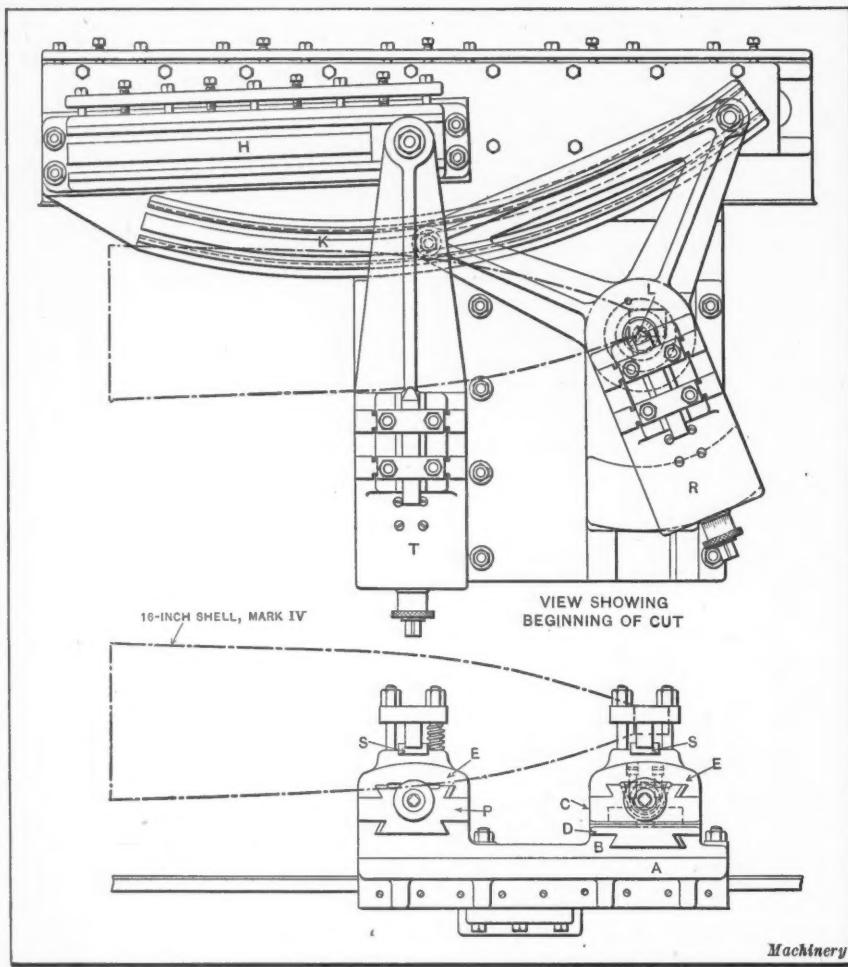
Plan and Front Elevation of Carriage and Tool-slides of Shell Turning Machine
